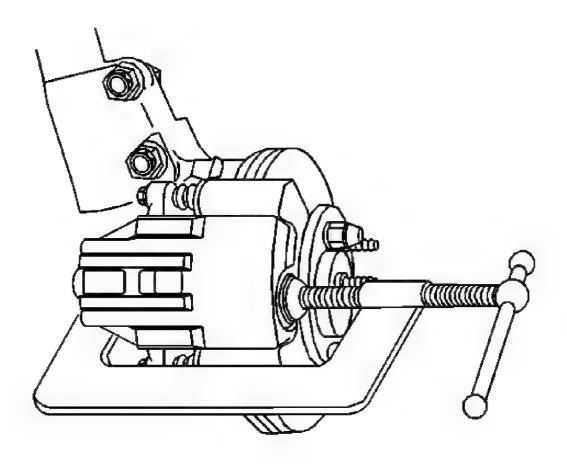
Using C-Clamp To Compress Caliper Piston Courtesy of GENERAL MOTORS CORP.
